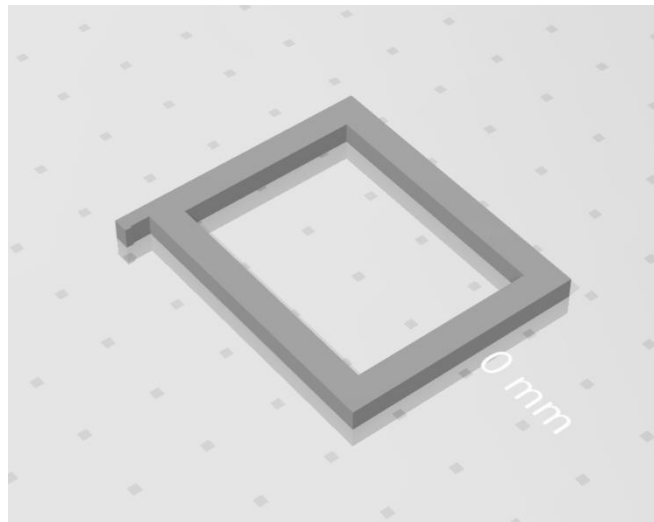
Recessed piece to be installed on Audio Recorder for attachment to Battery Module.
